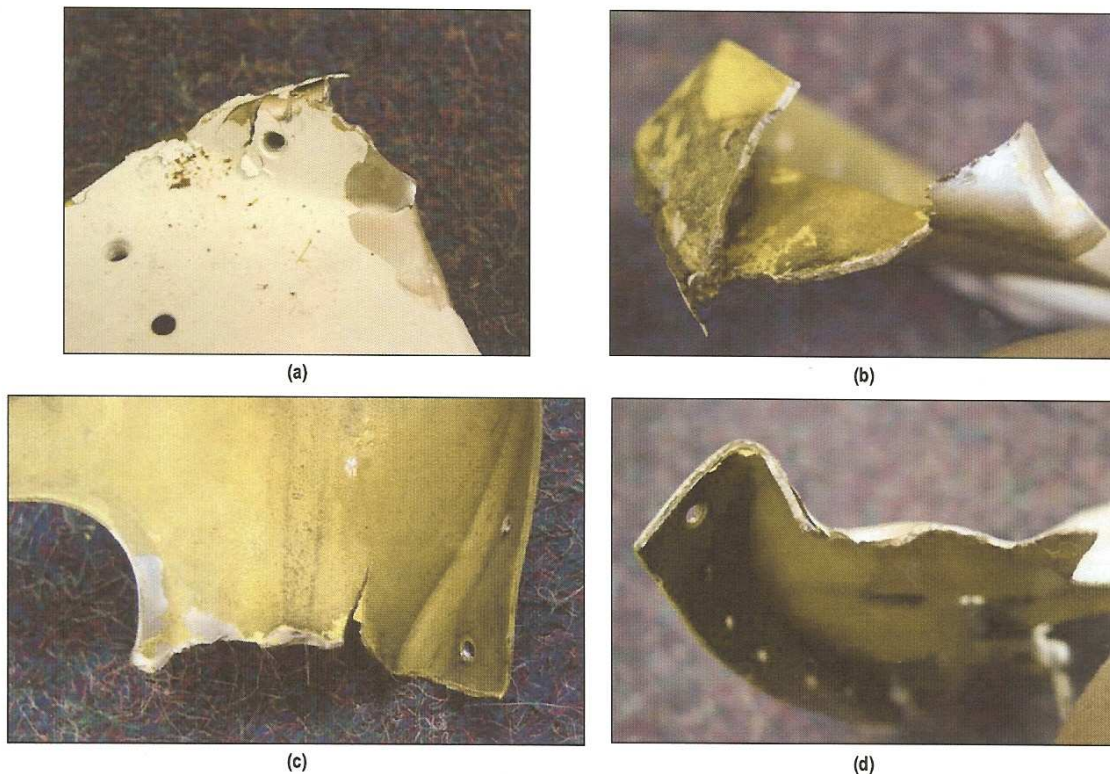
Views of the fracture surfaces of the tail rotor gear box attachment: (a) Left hand fracture surface as shown in Figure 16 (magnification: 0,9x); (b) left hand fracture surface as shown in Figure 16 (magnification: 1,3x); (c) right hand fracture surface as shown in Figure 16 (magnification: 0,76x); and (d) right hand fracture surface as shown in Figure 16 (magnification: 1x).
